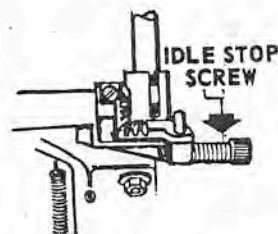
Slow idle speed can be adjusted by turning the stop screw located on speed control vertical shaft gear as shown.
